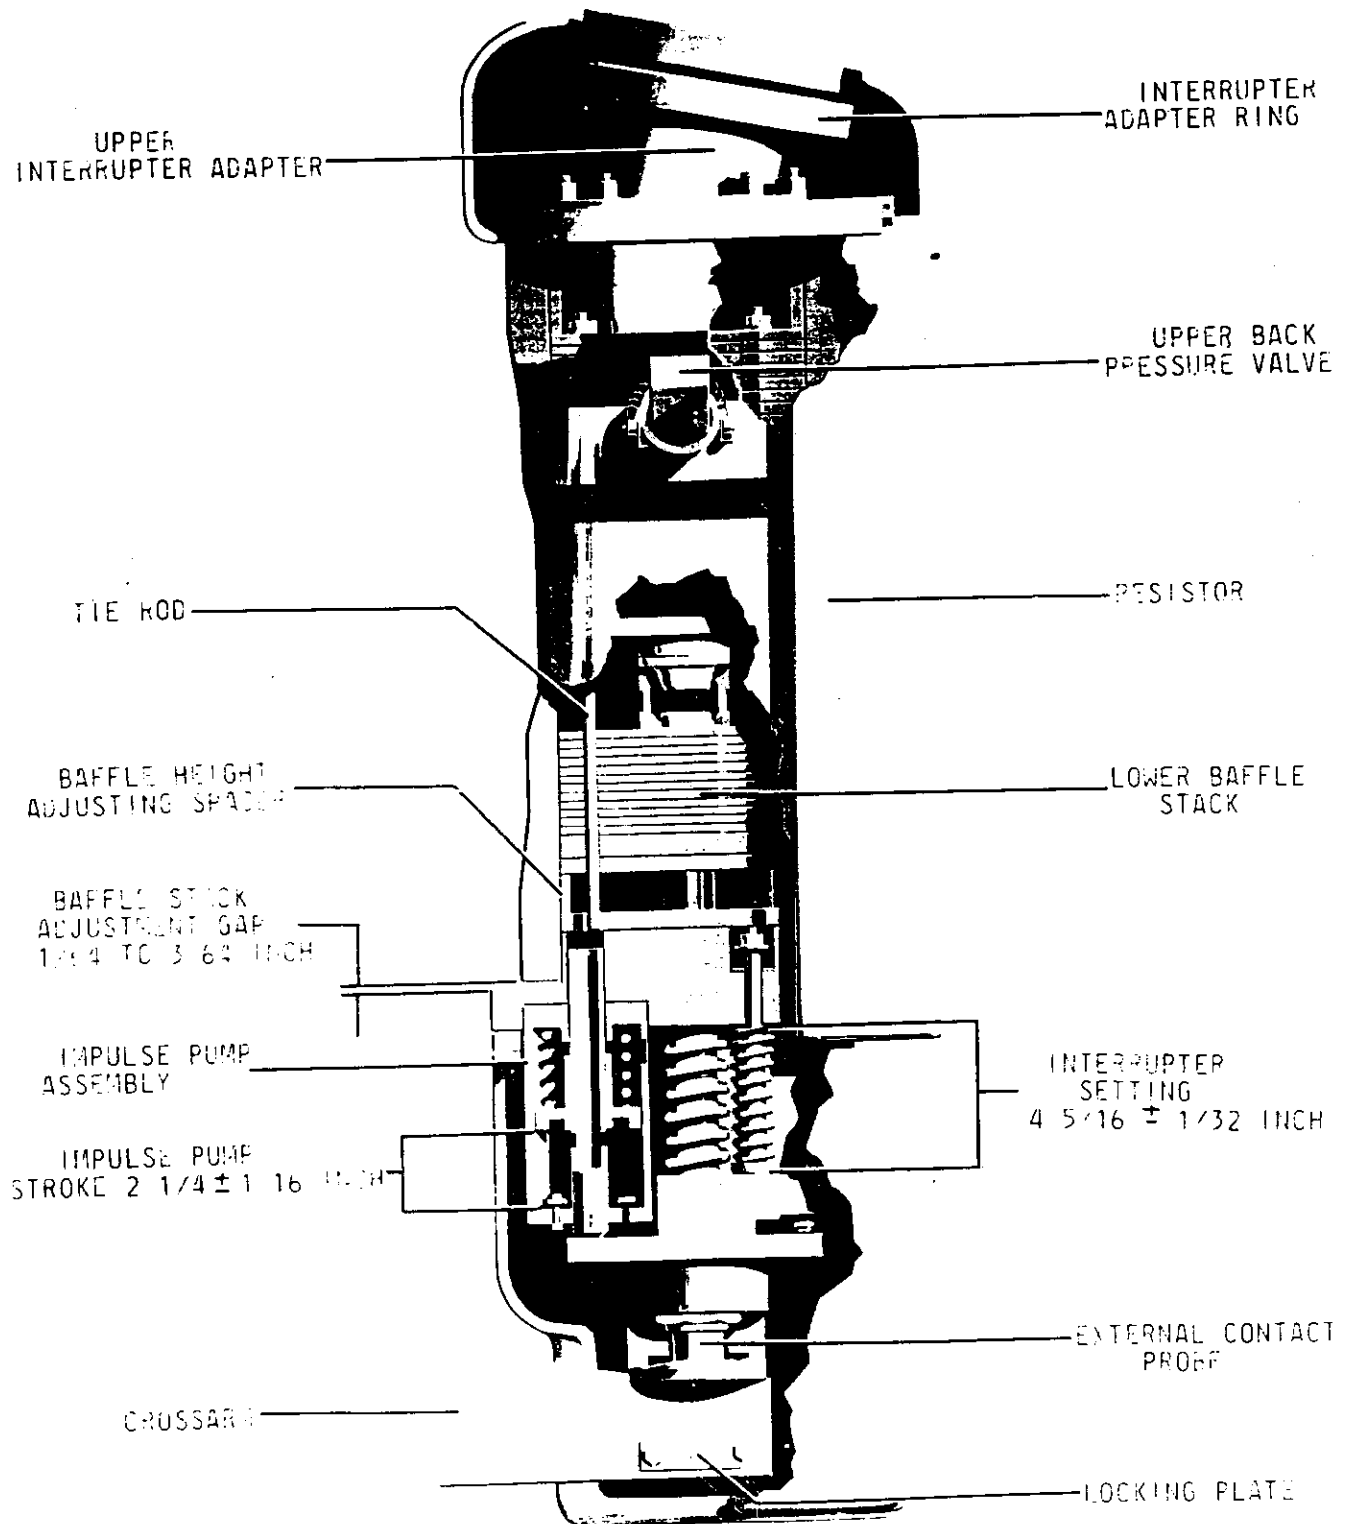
Cutaway Front View of the Interrupter of a Nominal 10,000 mva Breaker
